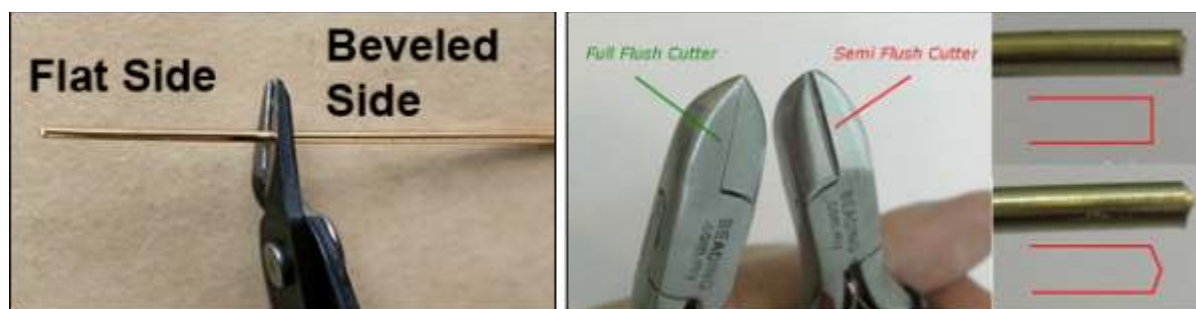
Wire Cutter – Method to Use Wire Cutter and Results
